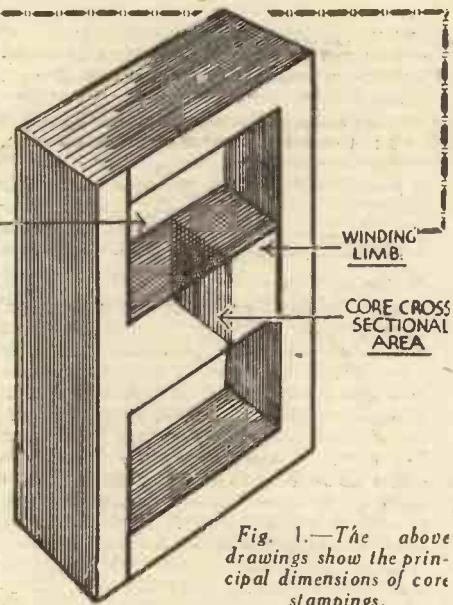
The above drawings show the principal dimensions of core stampings.
